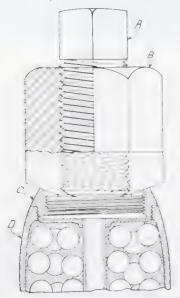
TOOL FOR REMOVING BRASS SOCKETS.
